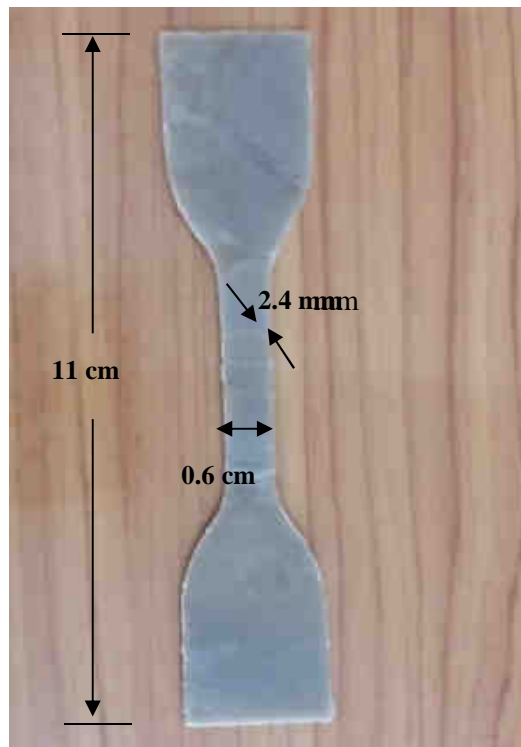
Photograph of the tensile specimen coupon dimensions centimeters.
